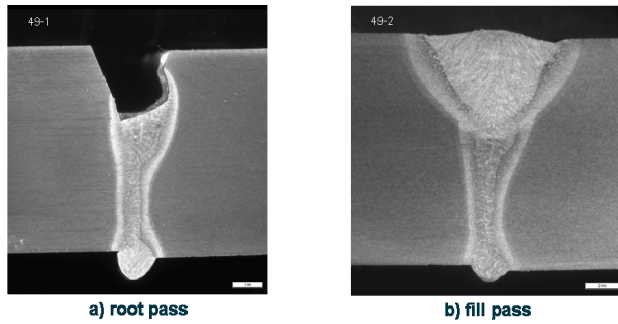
Cross-sections of 14 mm thick X70 material, single V-butt joint preparation, 8 mm root face and 45° included angle welded with metal cored wire
